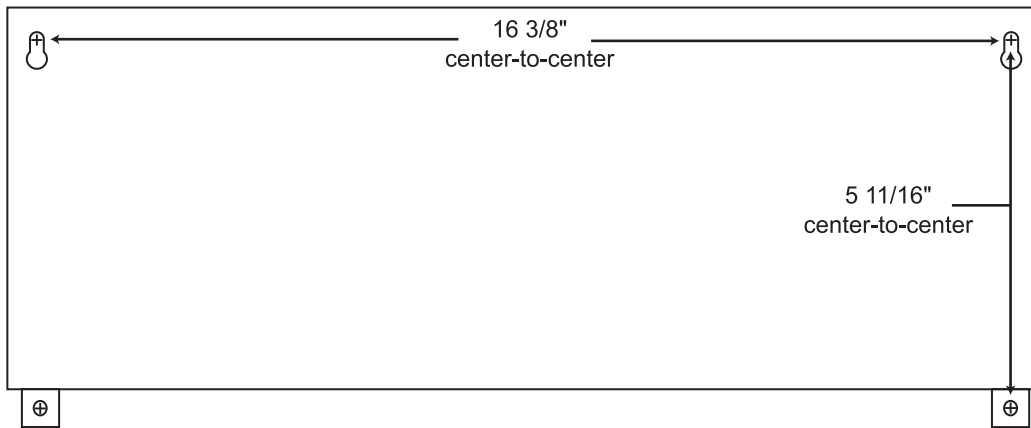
Wall Mounting the 1175044L1/L2 BBU
